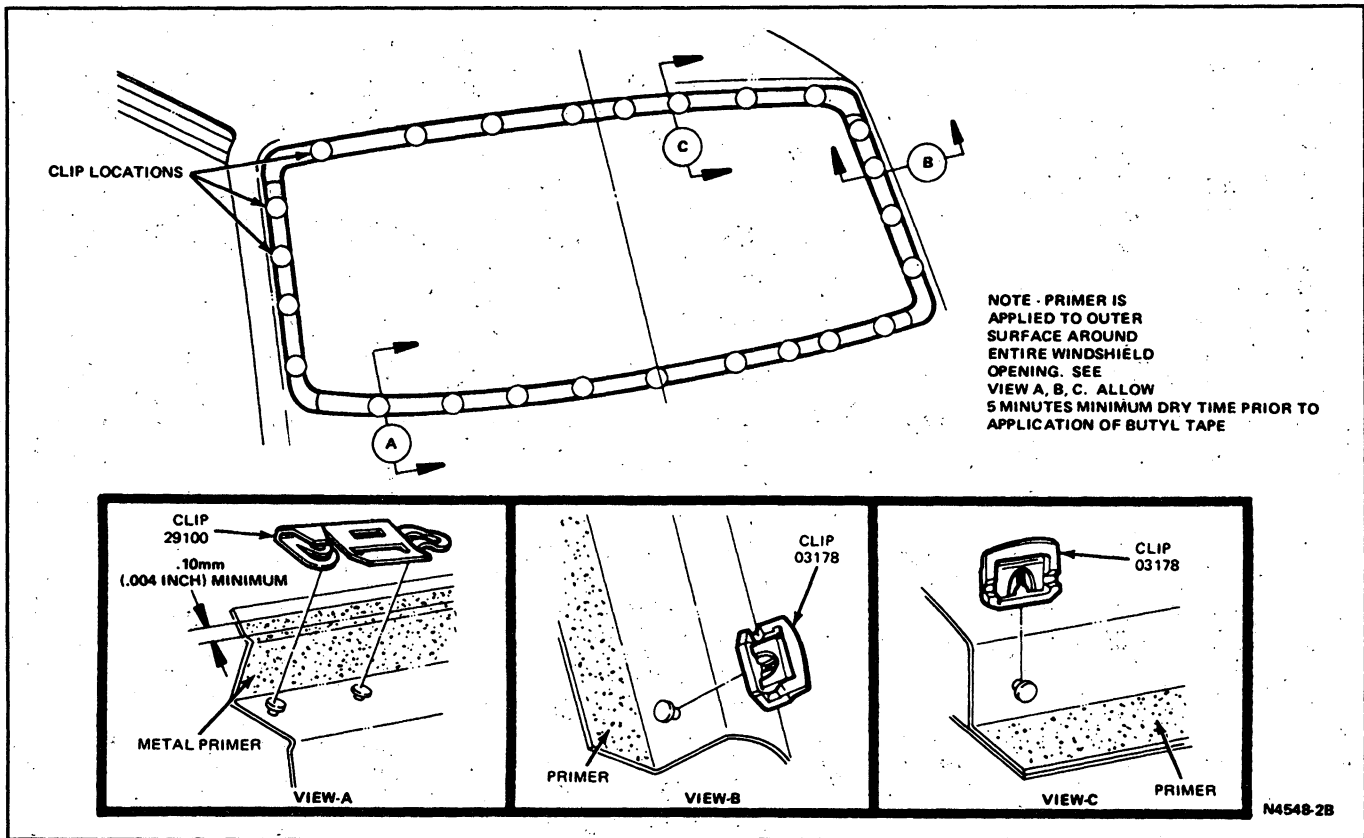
Windshield Sealers—F-150—F-350, F-Super Duty and Bronco
